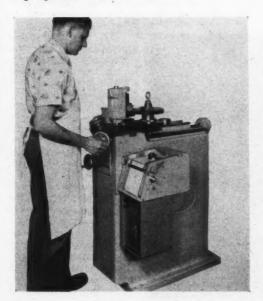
Red Ring type PCB Involute tester for gear shaving cutters
